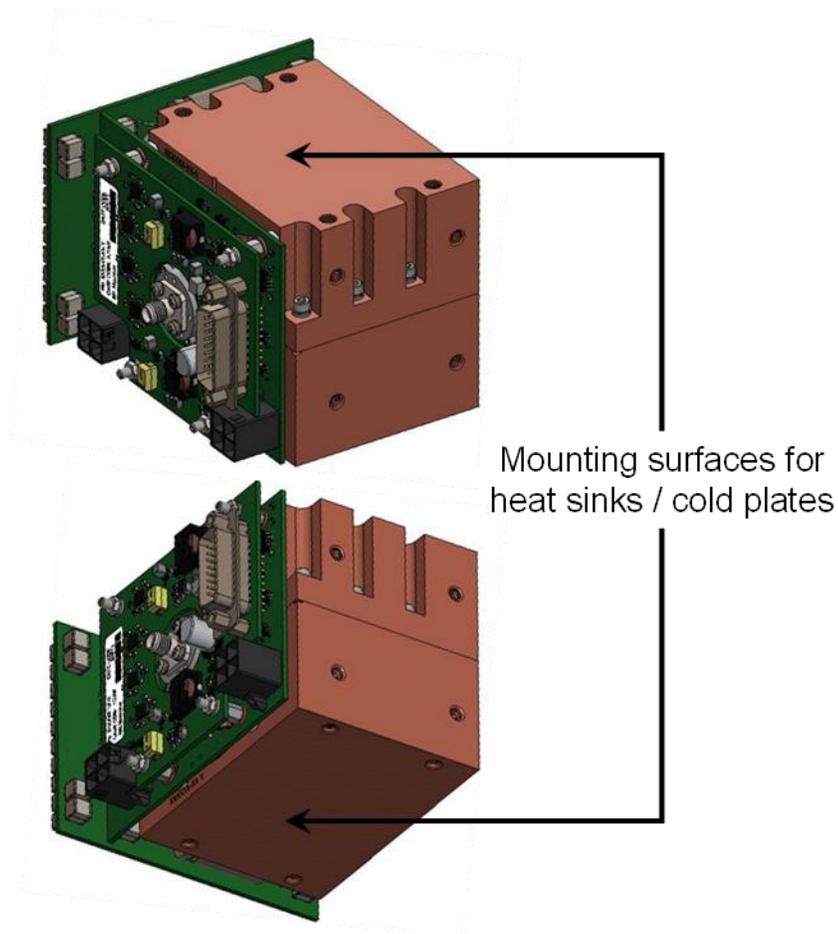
Heat sink mounting locations on typical Spatium clamp surfaces.
